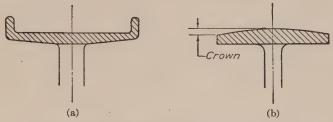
(a) Flanged Pulley. (b) Crowned Pulley.
